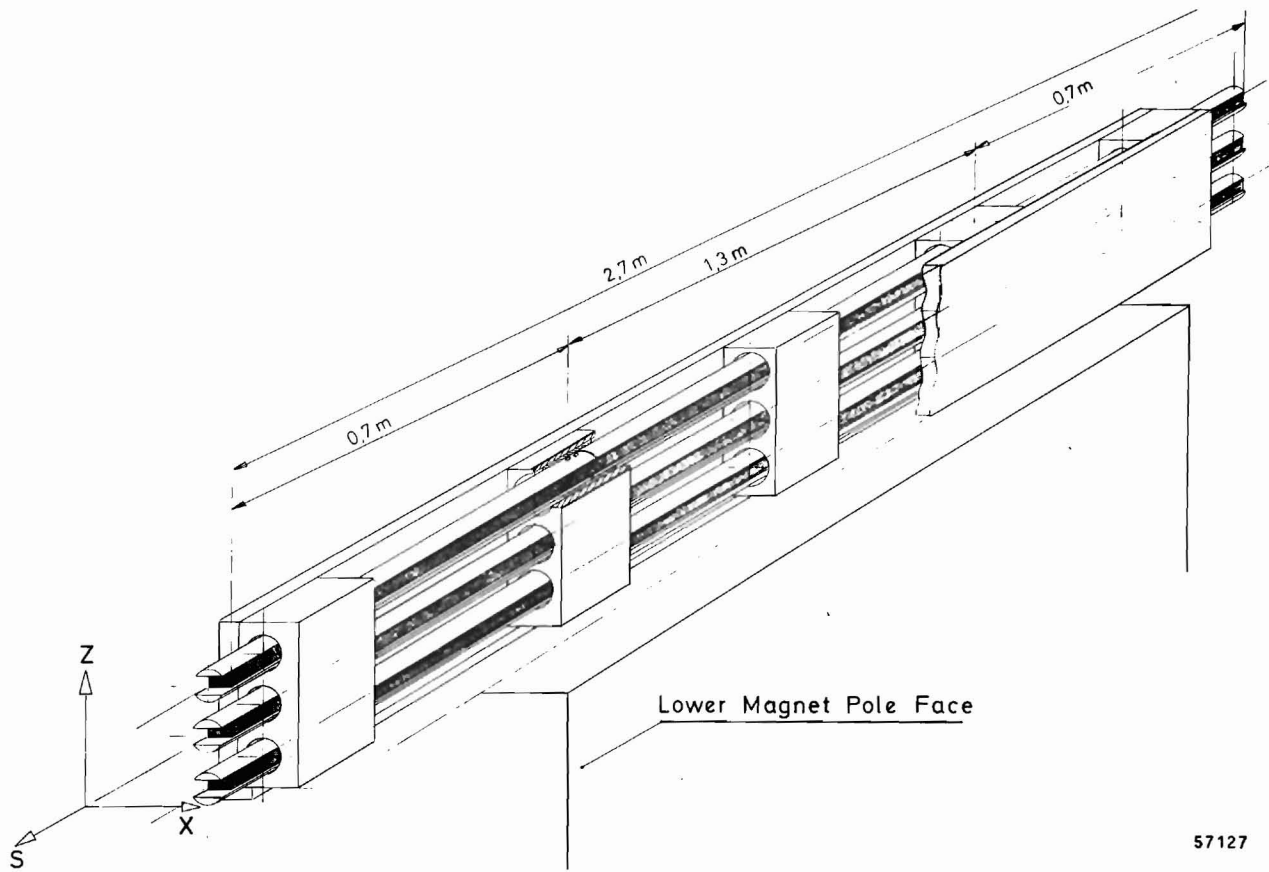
Long coil assembly consisting of nine individual coils. The pneumatic motor is not shown.
